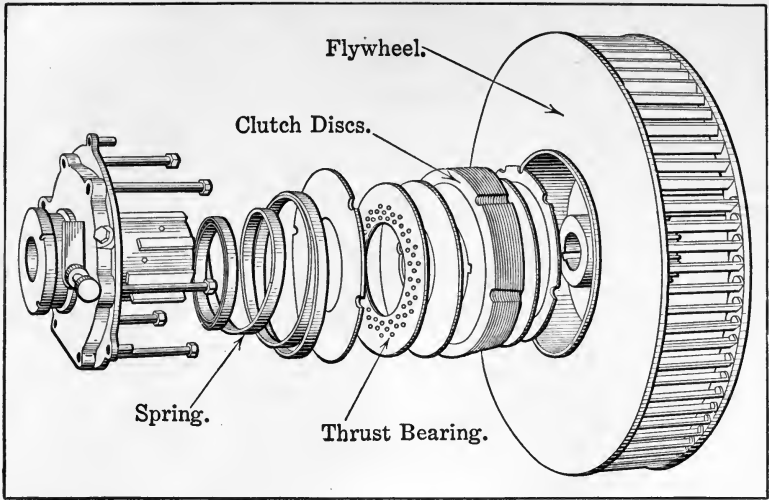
Multiple-Disk Clutch Utilized on Franklin Automobiles is Housed in Blower Fly Wheel. Parts are Shown Separated to Make Construction Clear.
